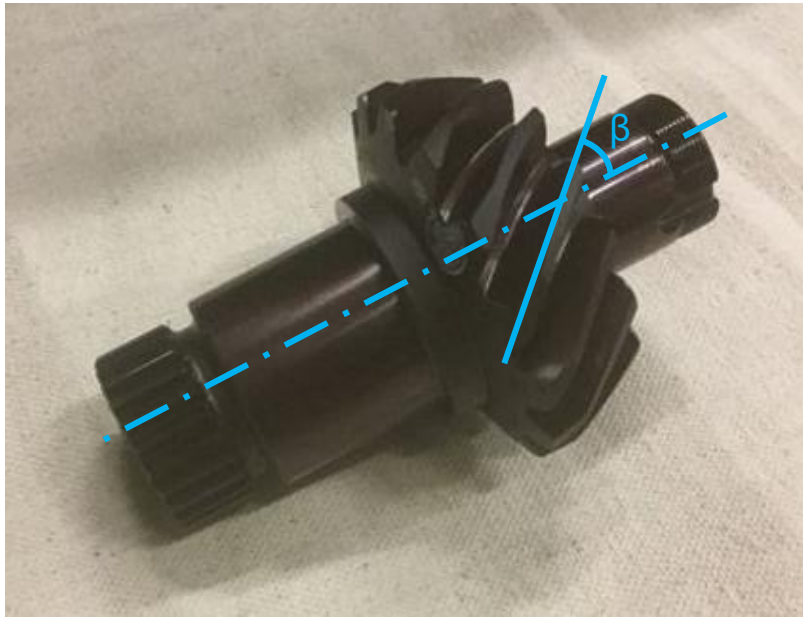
UH-1 tail-rotor gearbox input shaft [30]
